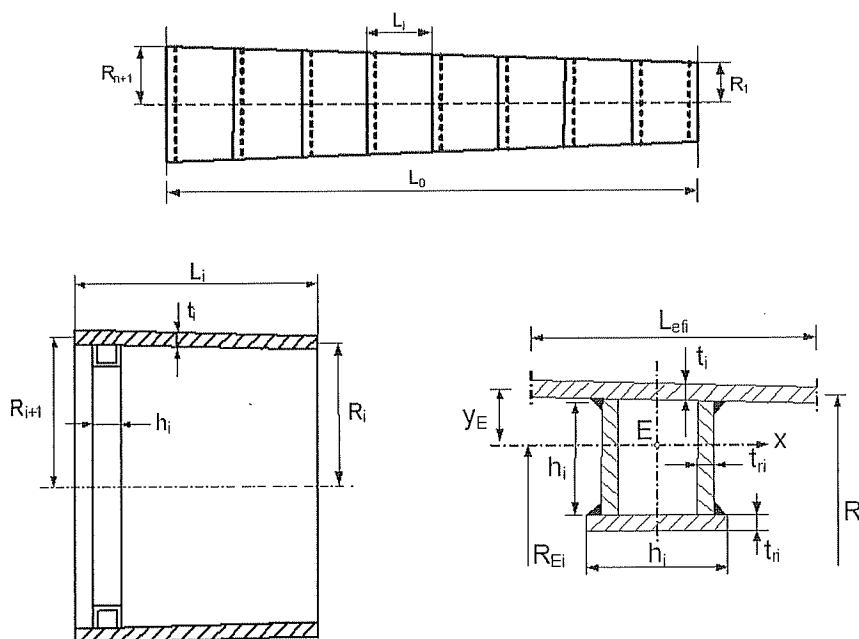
The main dimensions of the conical shell – a shell segment with the ring-stiffener of welded square box section
